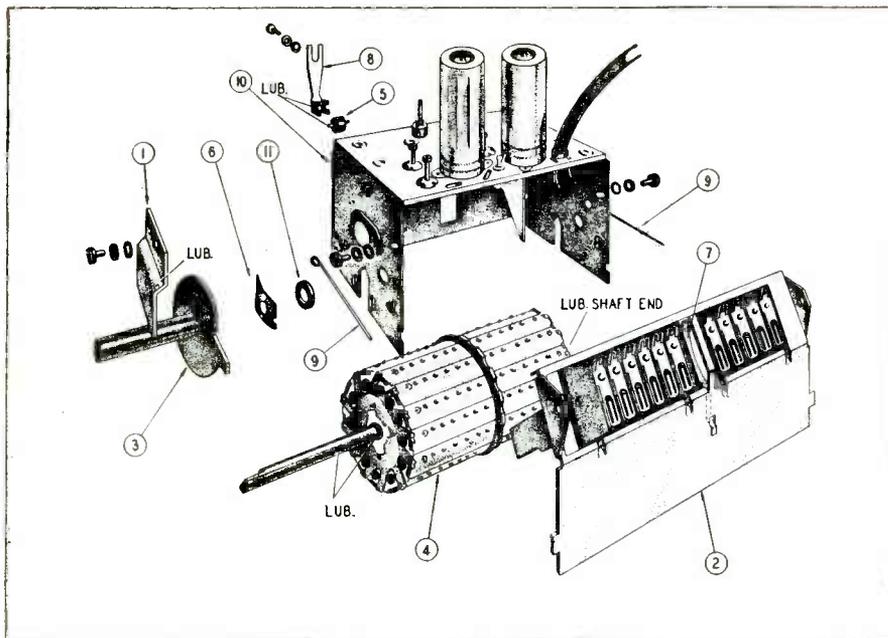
Exploded view of Philco 12-position turret tuner.
